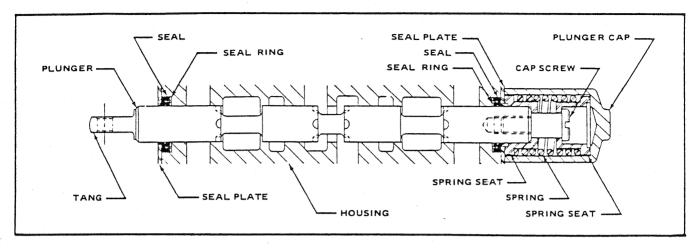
Double Acting - Spring Centered Plunger (Hydraulically Balanced)
